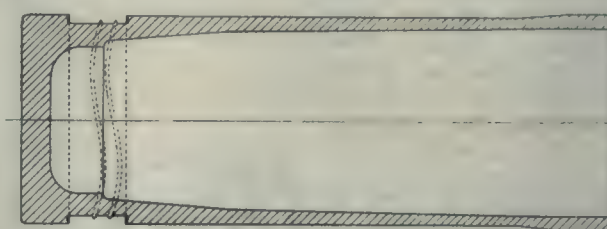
THE 18-POUNDER SHELL PARTLY MACHINED.
